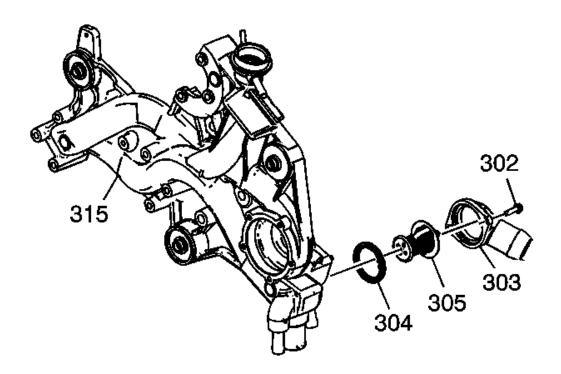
View Of Thermostat Housing, Bolts, Thermostat, & O-Ring Courtesy of GENERAL MOTORS CORP.
